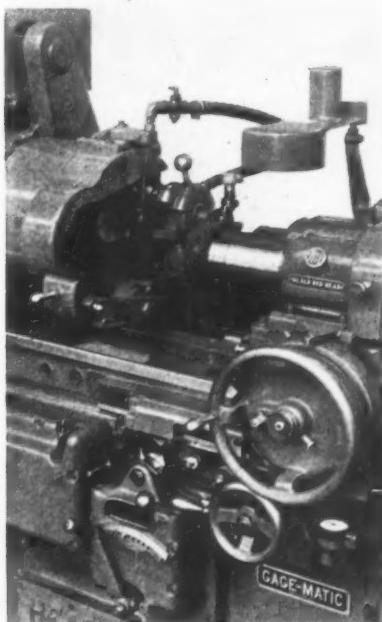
Close-up View of Set-up on Machine Shown in Fig. 1
